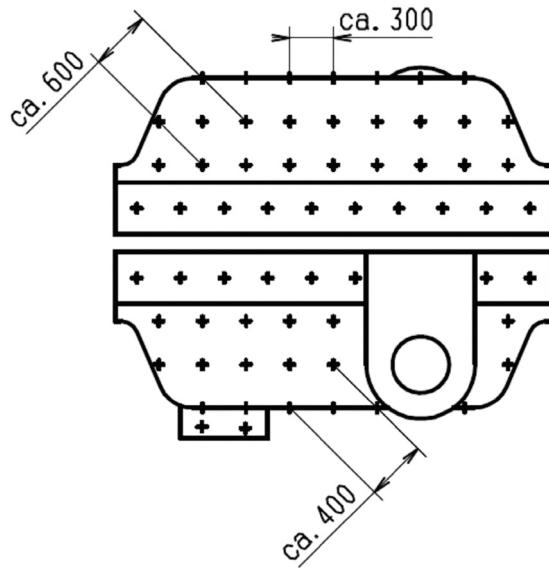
Example of welded-on discs at Turbine HP casing.
